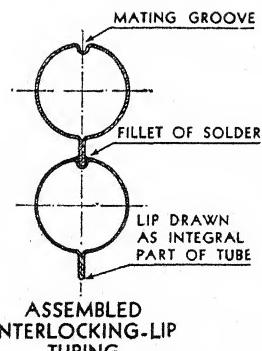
(b).—Diagram of tubing assembly. (Courtesy Specialty Brass Co., Kenosha, Wis.)
